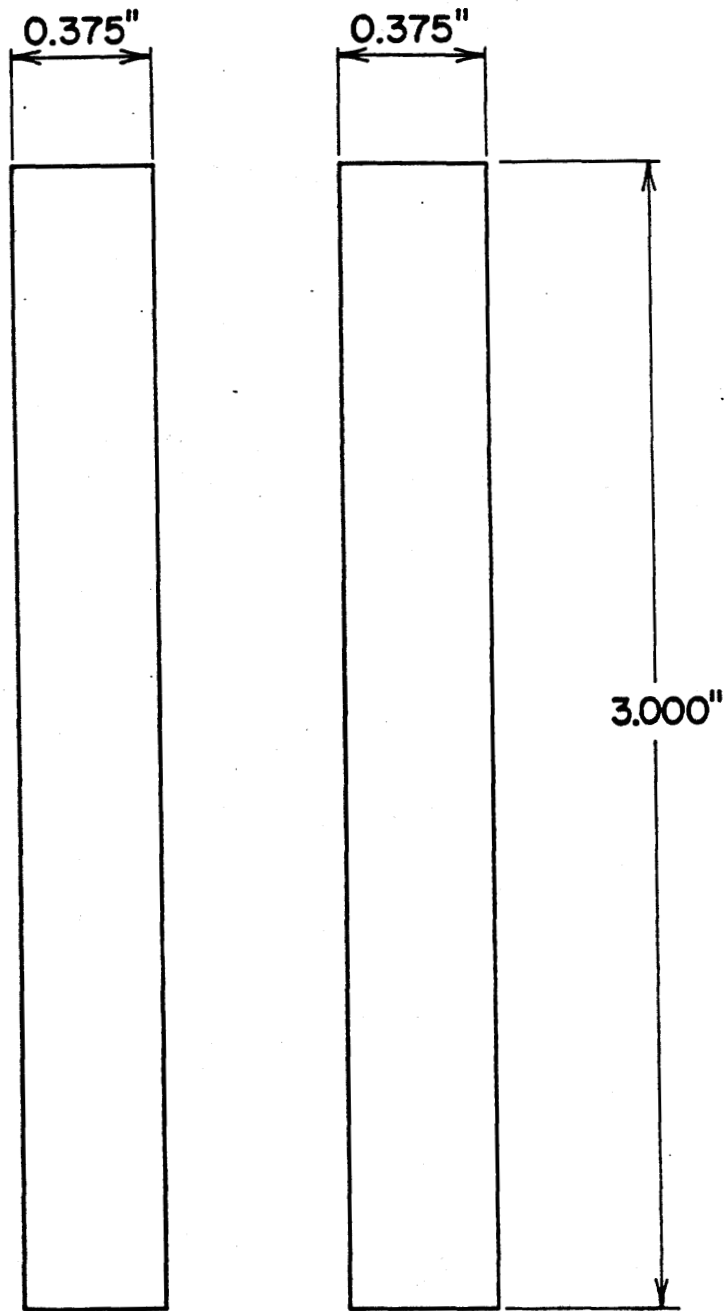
Manufacturing drawings--transducer assembly (soil anchors).
